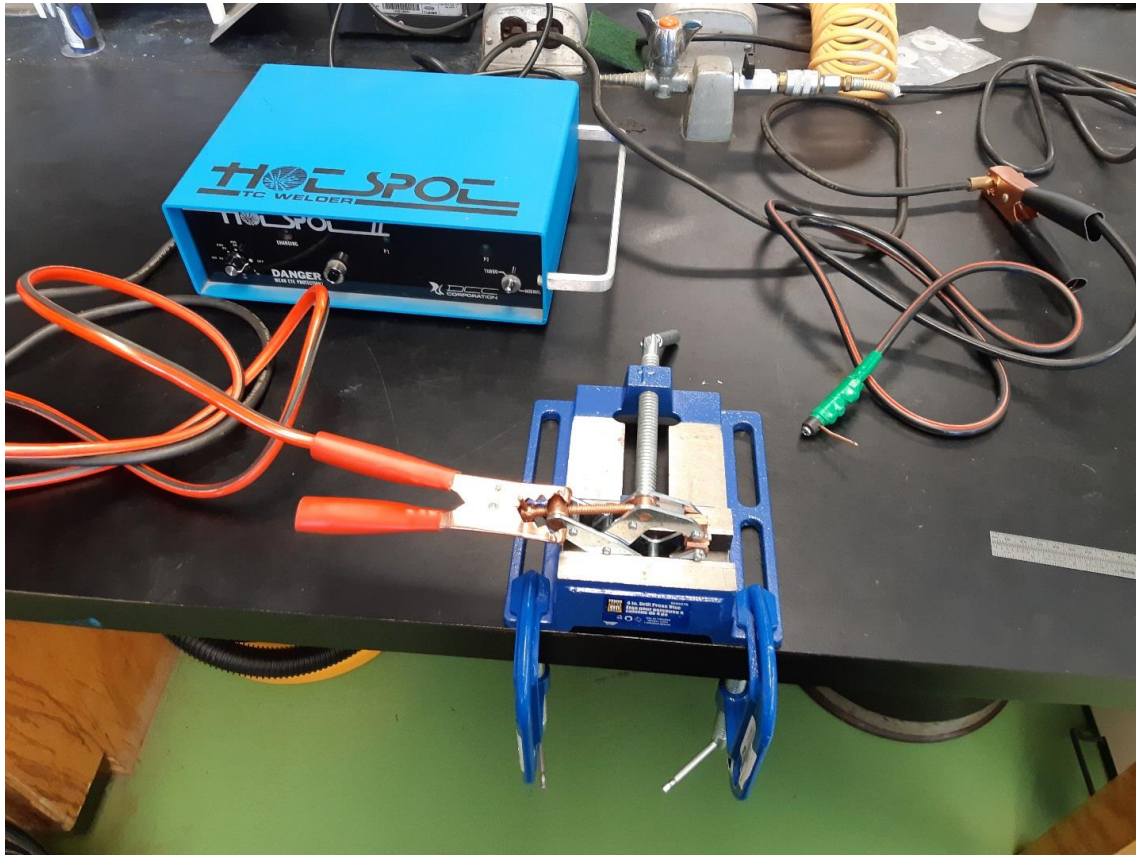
Experimental Setup for Tack Welding Showing Thermocouple Welding Equipment and an Assembly of Vises for Fixturing
